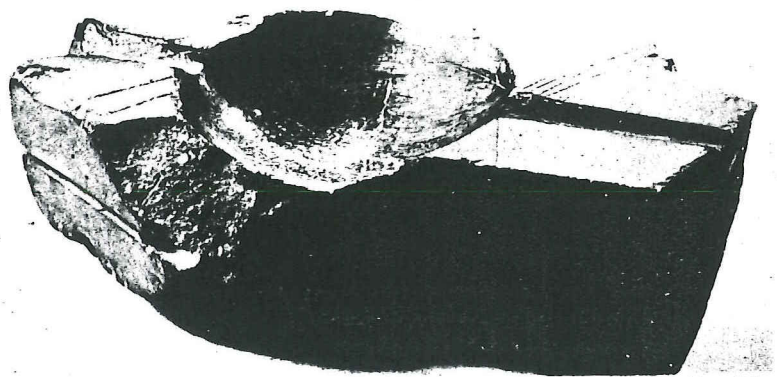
General view showing the fracture face, left after the detachment of the piece of mould, and the peripheral groove.
